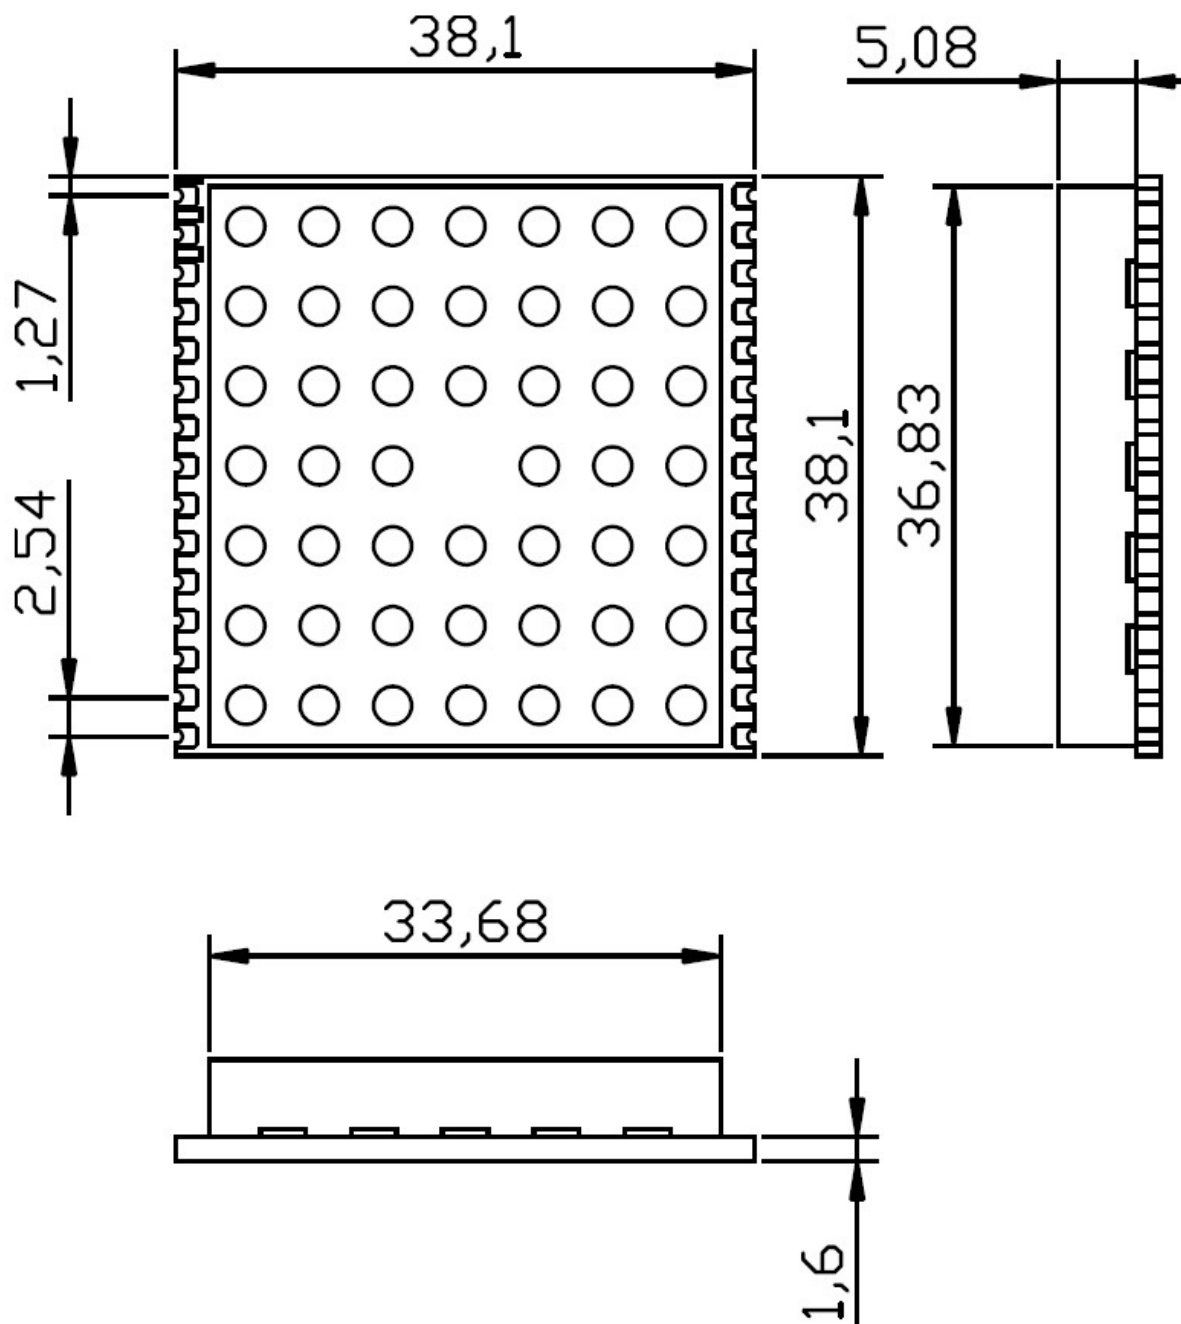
mURM ver. 2.0 dimensions (top and side views)
